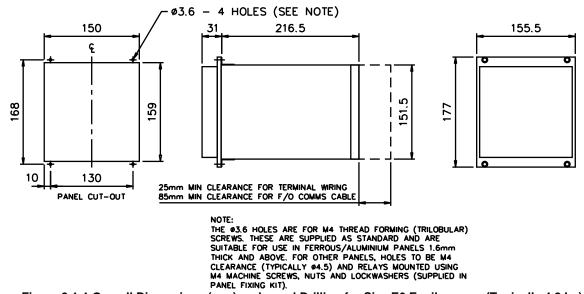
Overall Dimensions (mm) and panel Drilling for Size E6 Epsilon case (Typically 4.2 kg)
